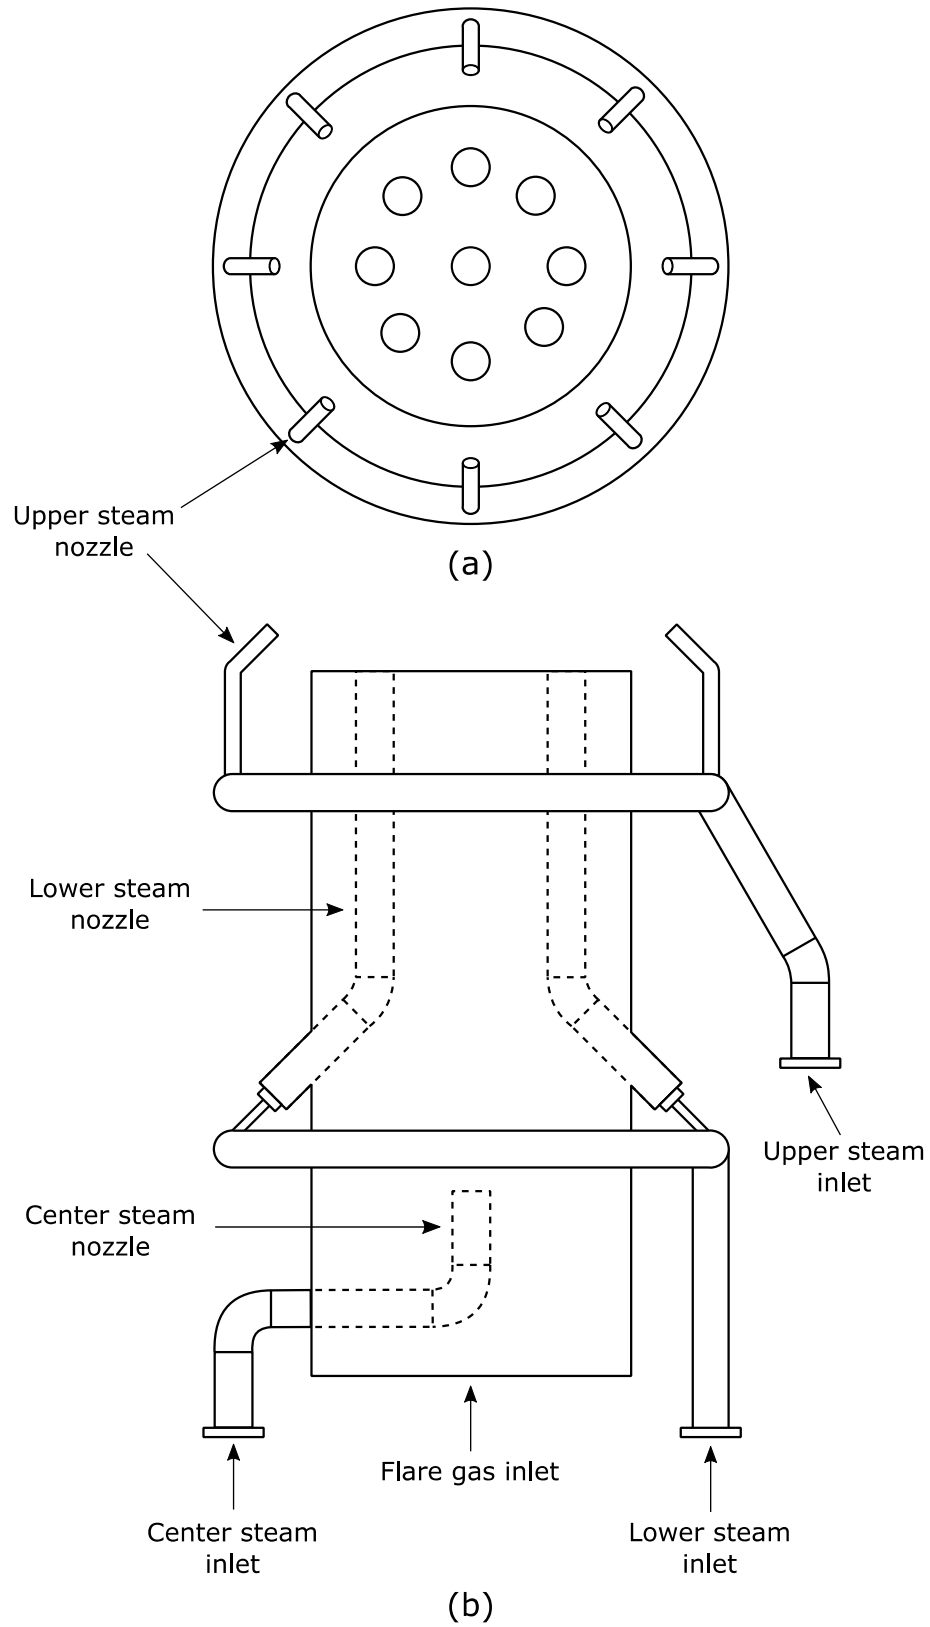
Typical design of a steam-assisted flare head with the (a) top view and (b) front view showing the configuration of lower, center, and upper steam nozzles.
